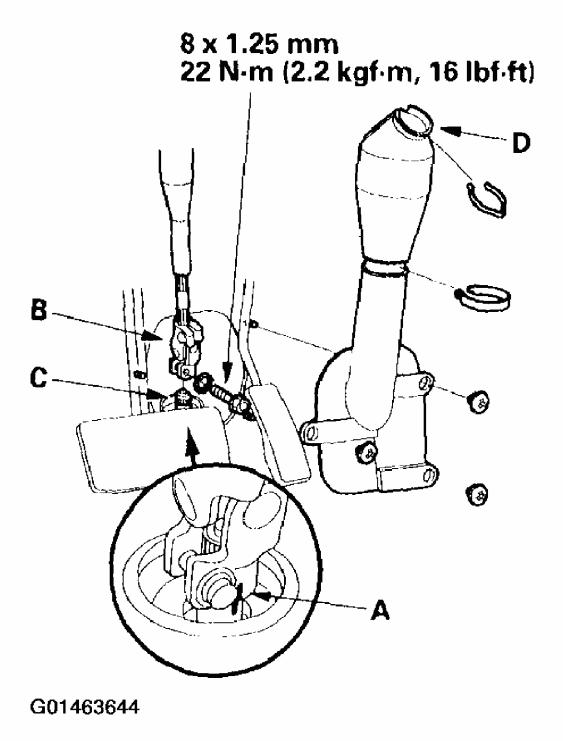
Aligning The Reference Mark On The Steering Joint & Steering Gearbox Pinion Shaft, & Connecting The Steering Joint To The Steering Gearbox Pinion Shaft
